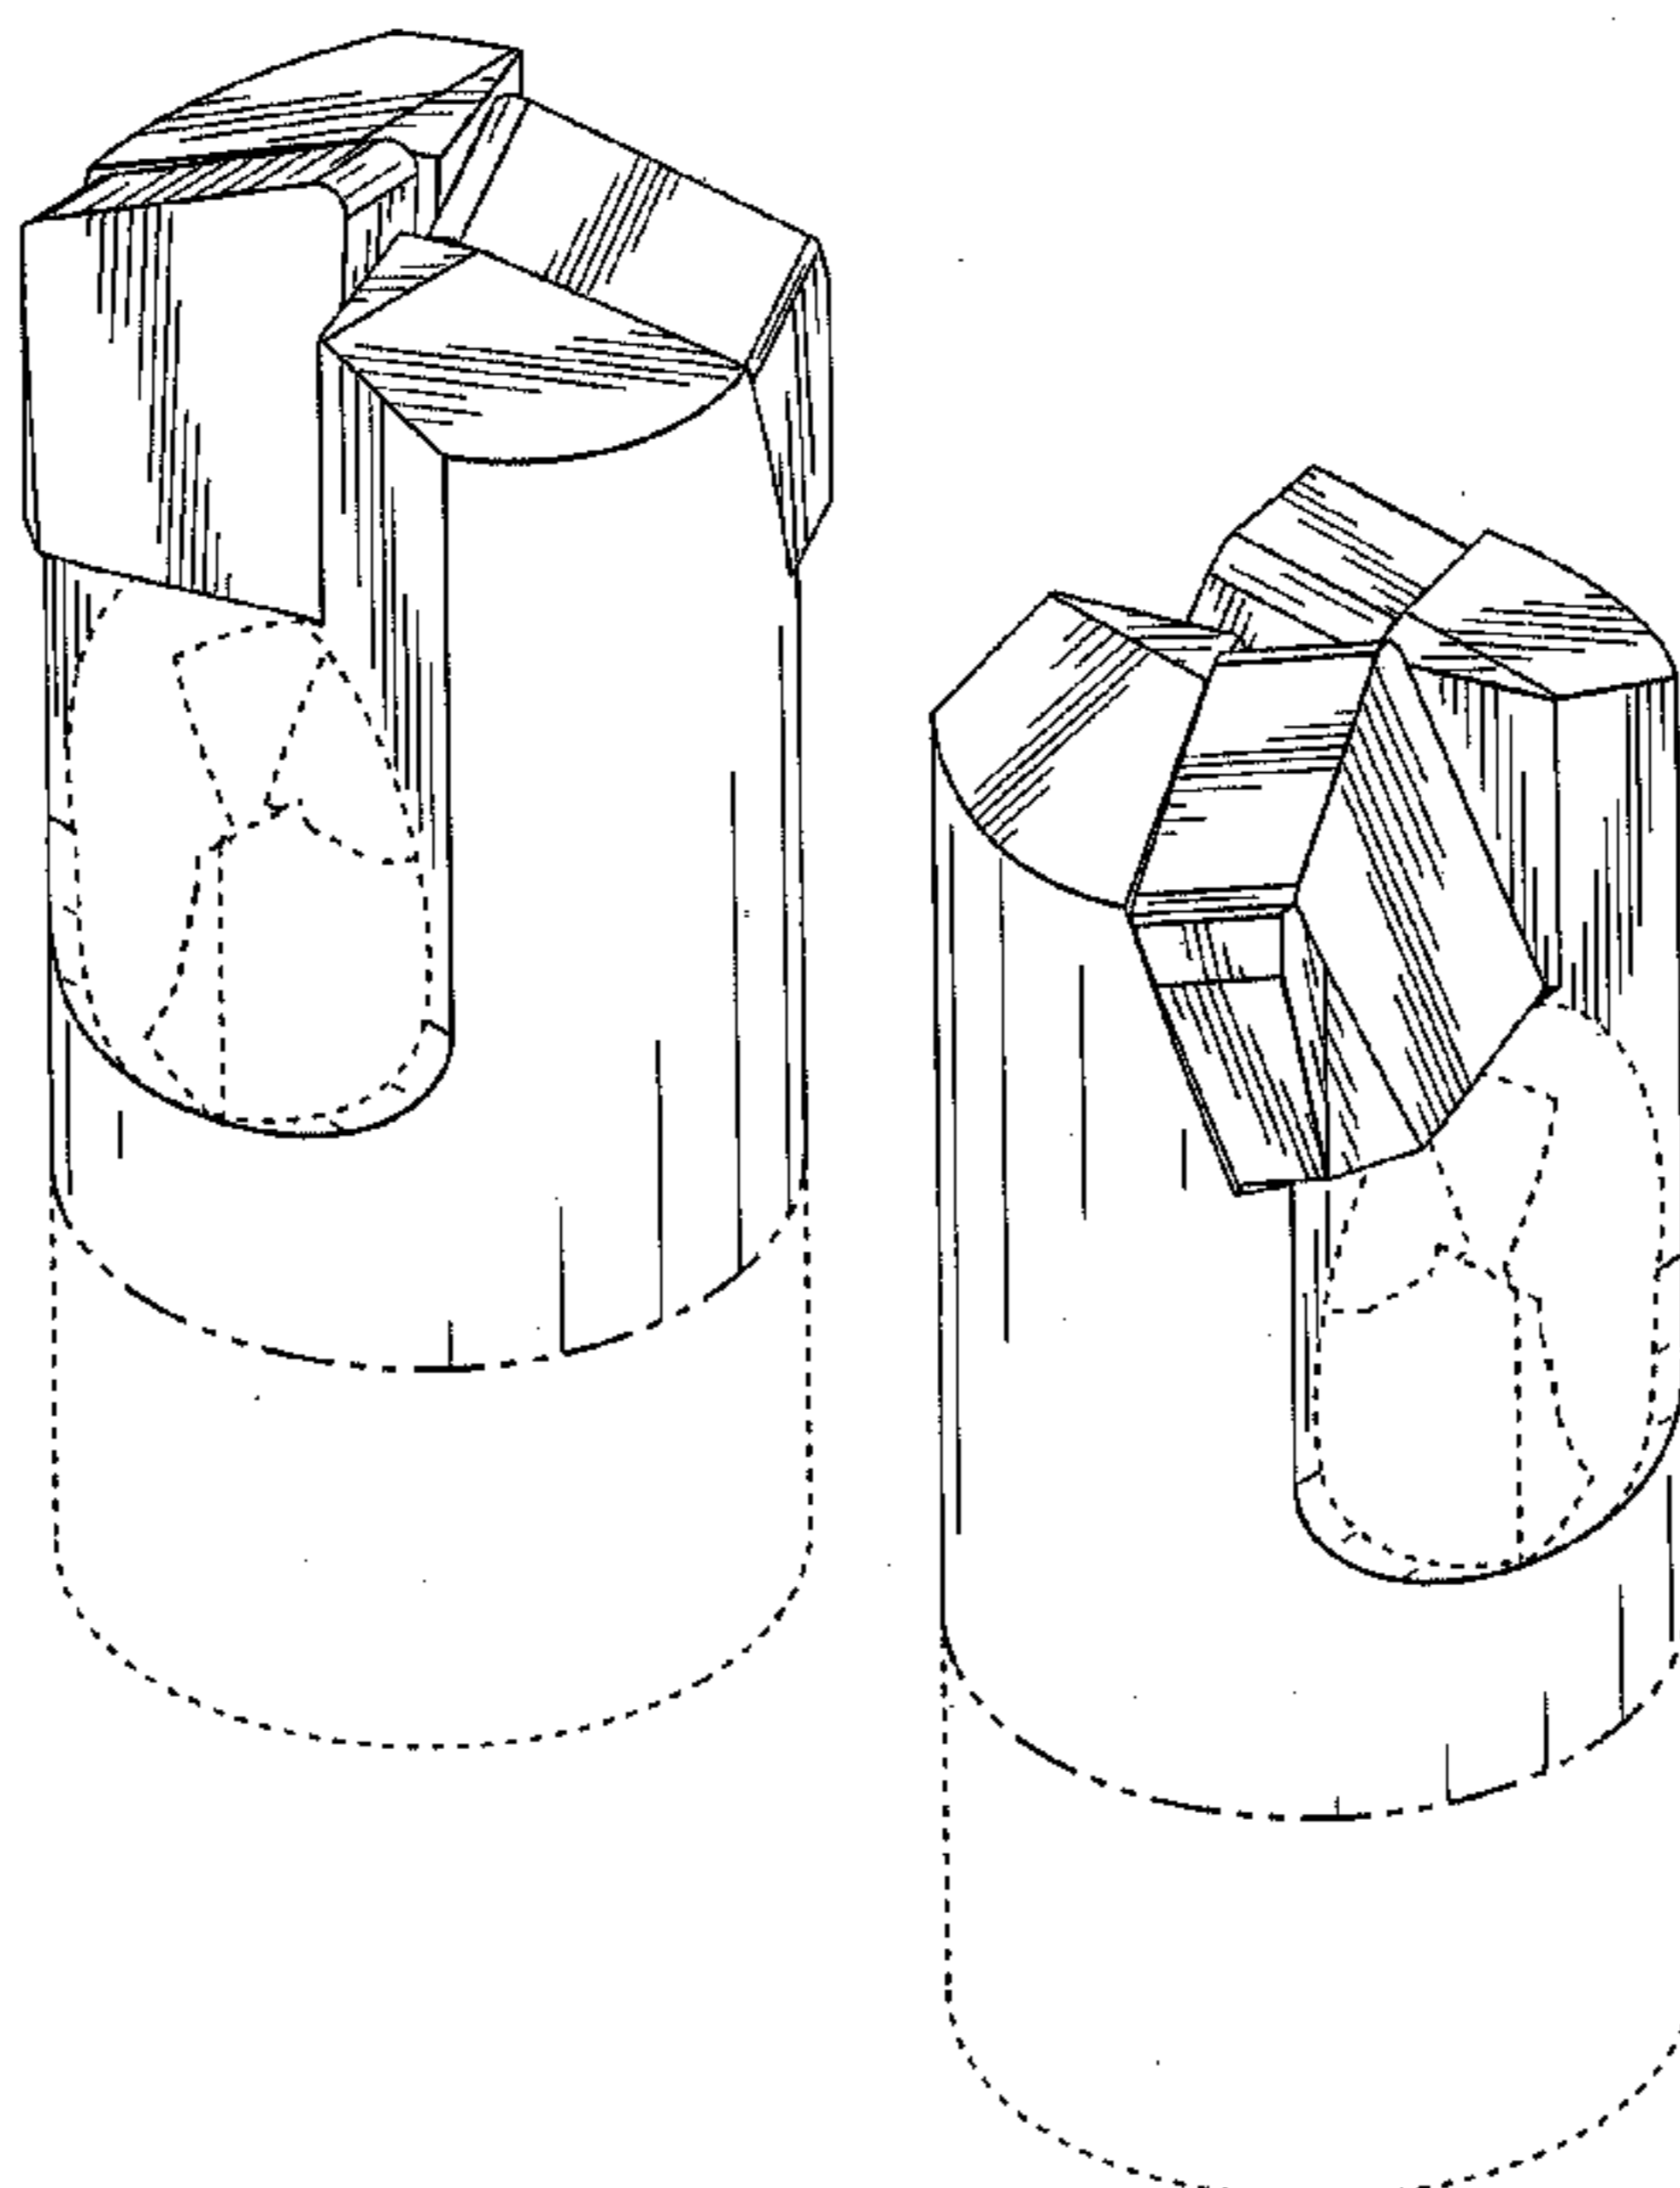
shows a rear view of the drill bit in FIG. 1.
